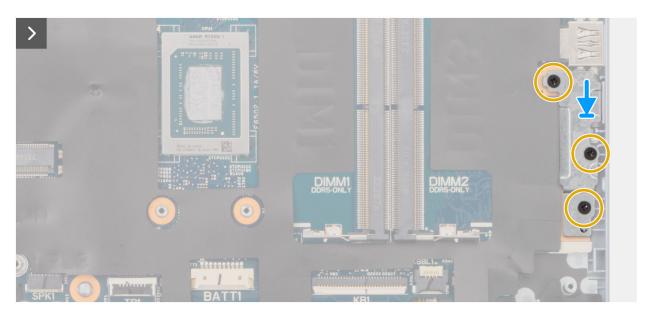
Installing the system board (for computers shipped with a plastic chassis)
